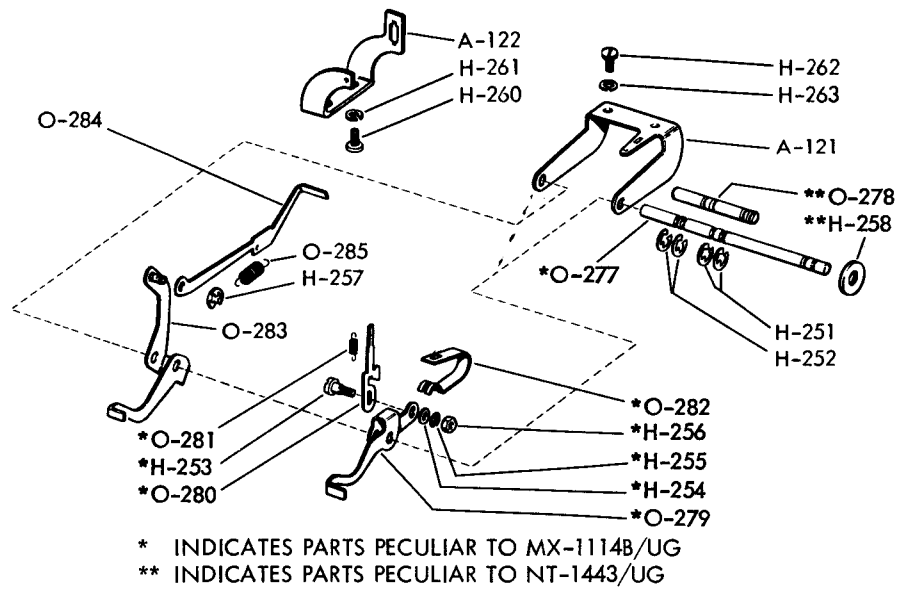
Keyboard MX-1114B/UG and Base MT-1443/UG, Keyboard Lock and Local Line Feed Mechanisms
